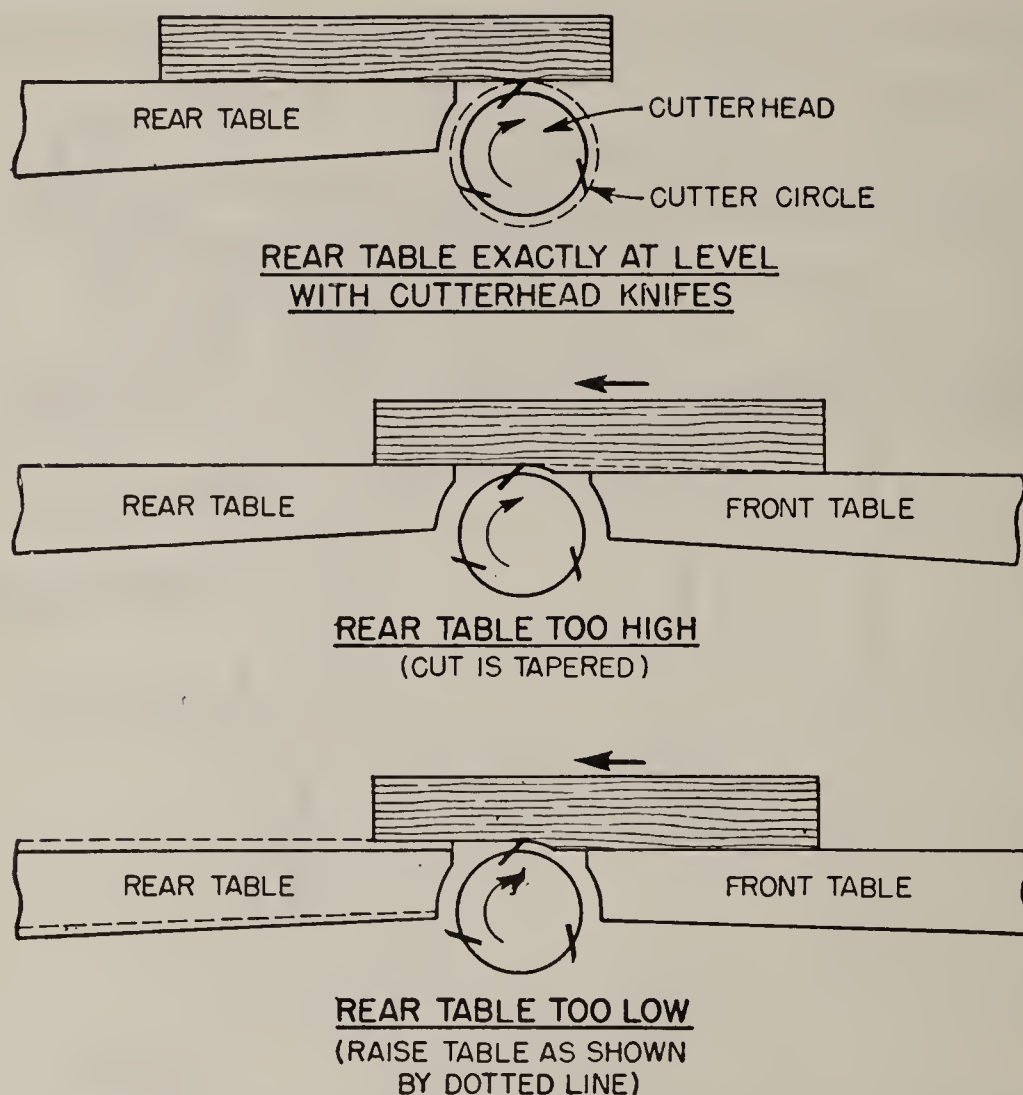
Outfeed-table adjustment on the jointer. In order to do satisfactory work, the rear or outfeed table must be adjusted to be exactly level with the knives at their highest point of rotation. The front or infeed table must be lowered slightly, the amount being equal to the depth of cut.
